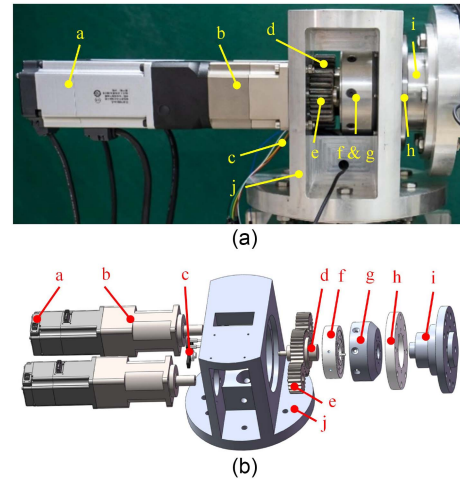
Prototype and CAD explosion view of the DMJ. (A) Prototype diagram of the developed DMJ; (B) CAD explosion diagram of the developed DMJ: (a) Permanent magnet synchronous motor. (b) Planetary gearbox. (c) Load-side single-turn absolute encoder. (d) Load gear. (e) Pinion. (f) Torque sensor. (g) Coupling flange. (h) Cross roller bearing. (i) Output shaft. (j) Support.
